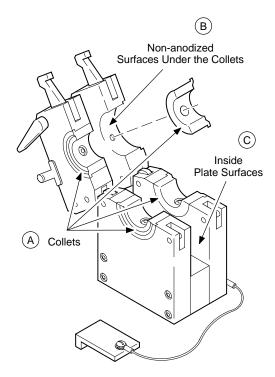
Cleaning the Collets and Collet Mounting Surfaces
